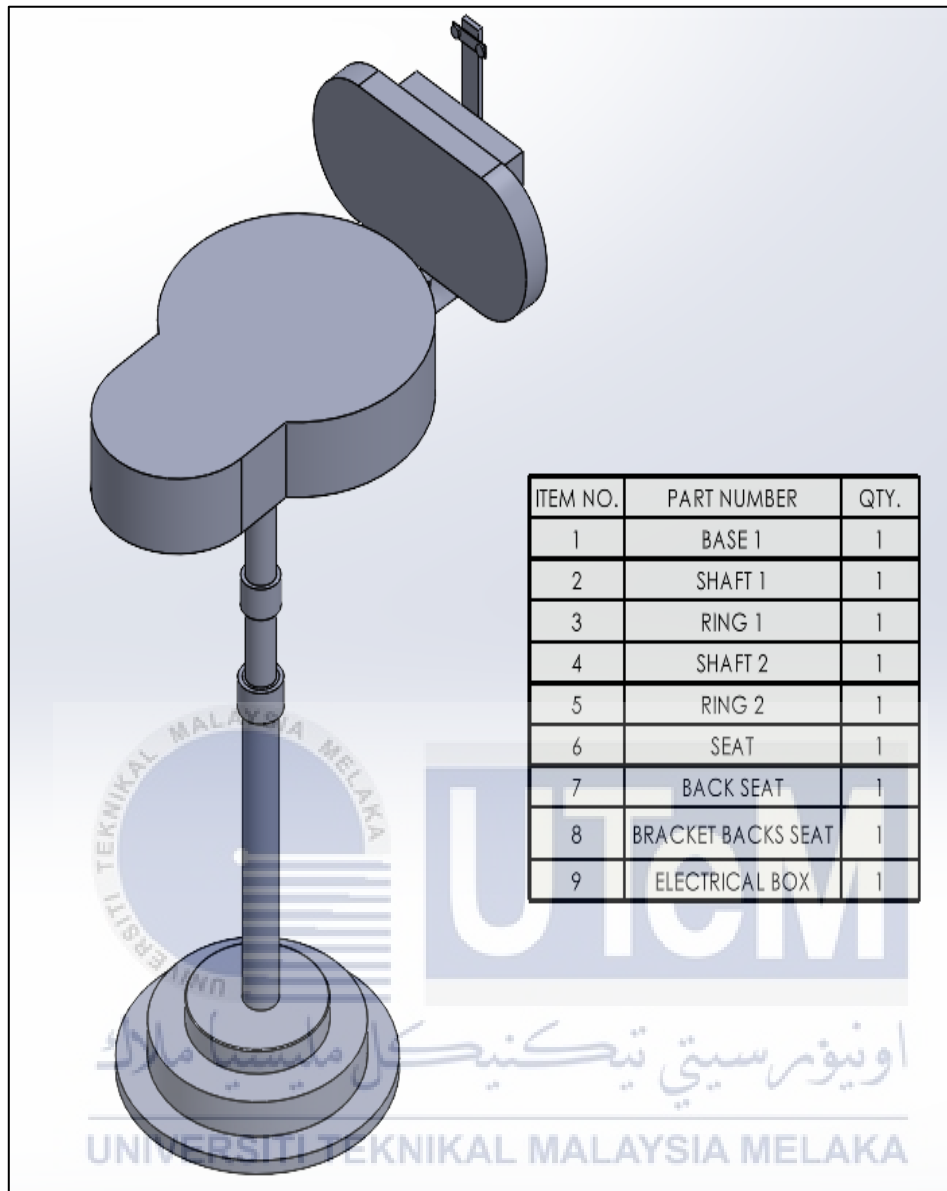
Assembly parts of The Smart Modular Lower Body Support
